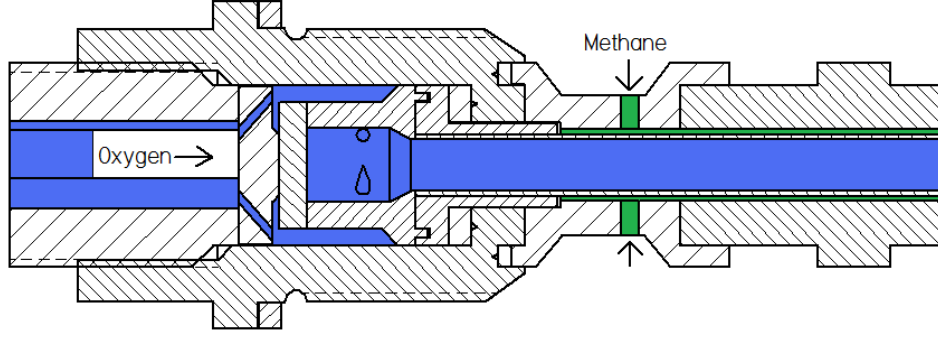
Swirl-Coaxial Injector Cross-Sectional View
